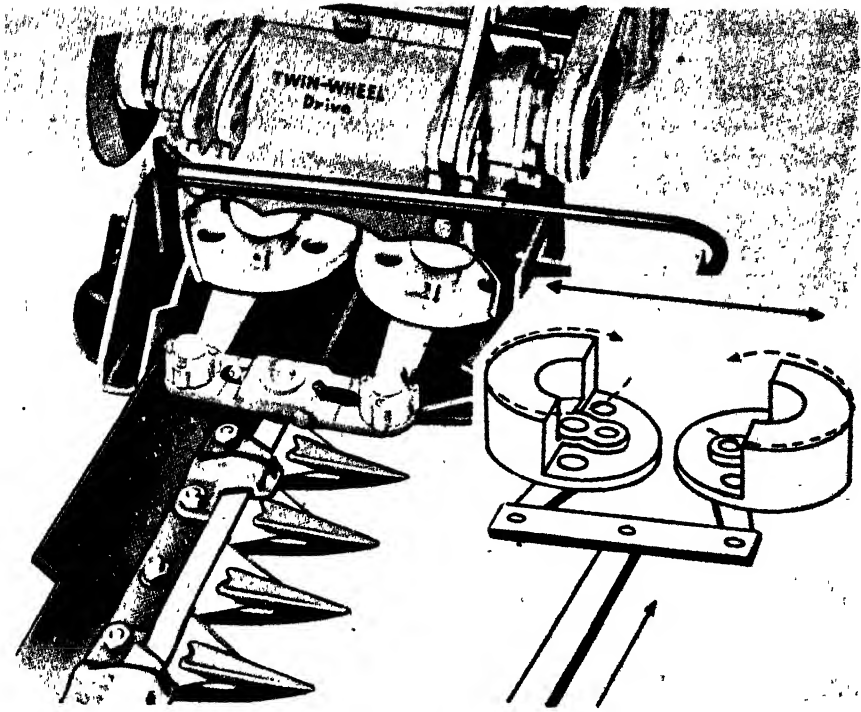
Pitmanless mower knife drive using twin counterbalanced wheels. (*Allis-Chalmers Mfg. Co.*)
